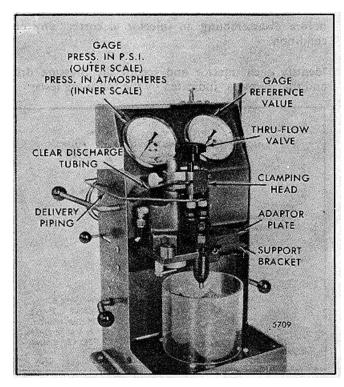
Injector Installed in Tester J 23010 with Clamping Head
